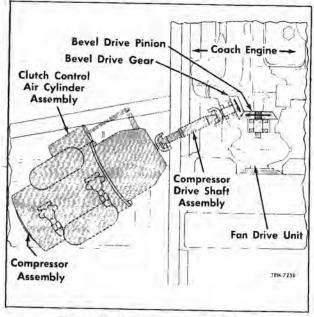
Compressor Drive Shaft and Accessory Drive Layout (Typical)
